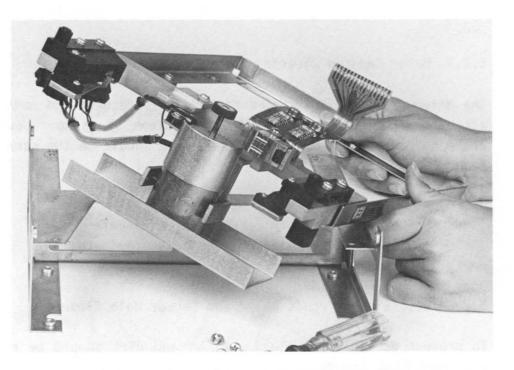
HEAD, MOTOR ASSEMBLY REMOVAL
